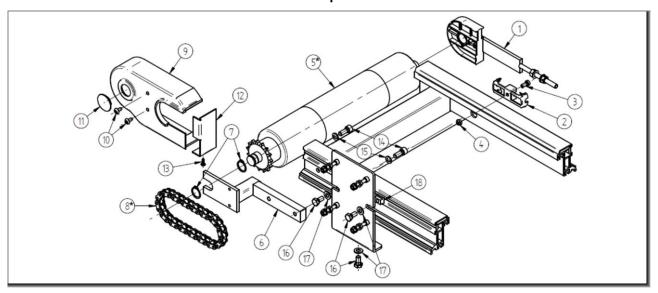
Parts list: External drive unit - drive unit - position of drive unit 14 - ZZ.900.0023.01
